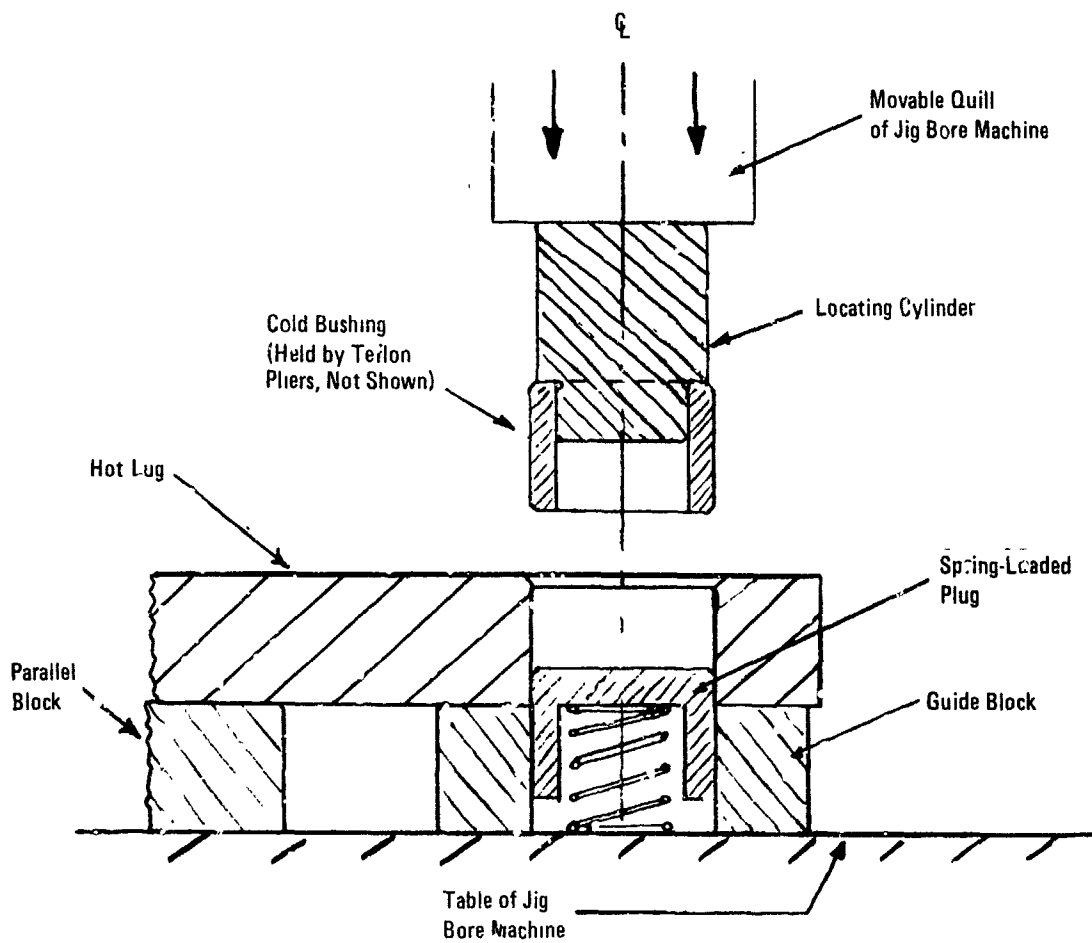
Installation Fixturing for Shrink-Fit Bushings
